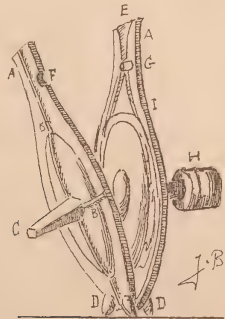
Half opened mould. G, bolt; H, wood handle; I, counterpart of mould.
